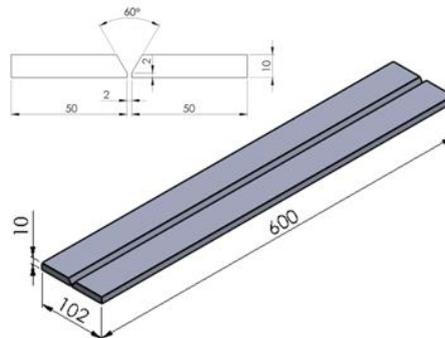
The welded joint configurations (dimensions in mm).
